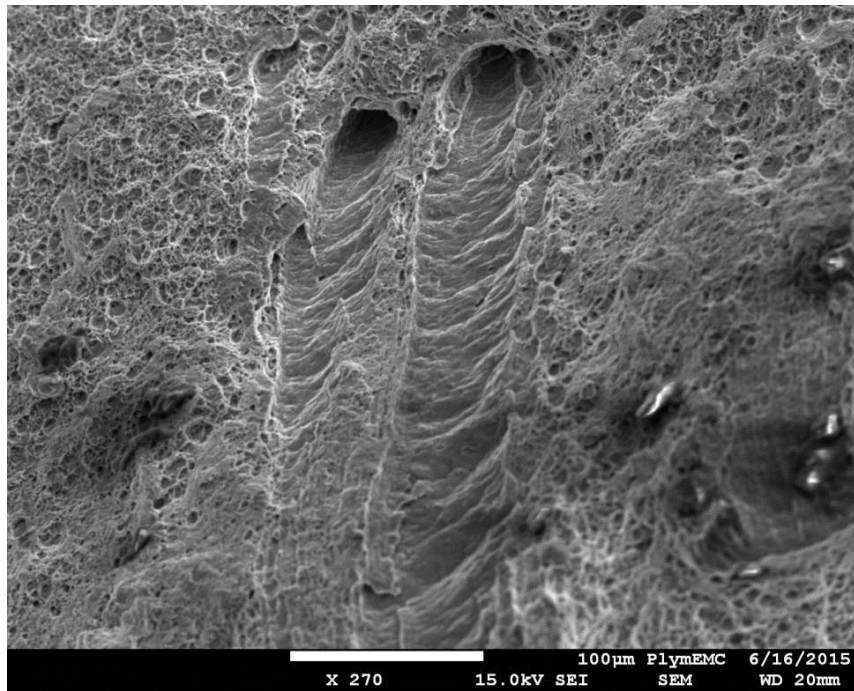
Wormhole defects on the fast fracture region of tensile fatigue specimen W117. As expected the fracture mechanism is microvoid coalescence.
